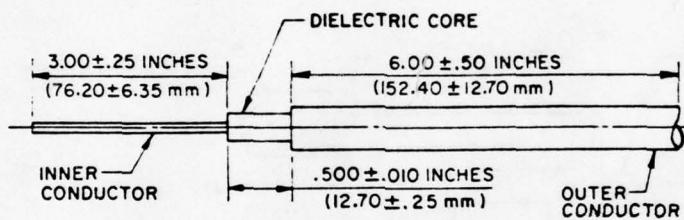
B Stripping Dimensions for Semi-rigid cables.
